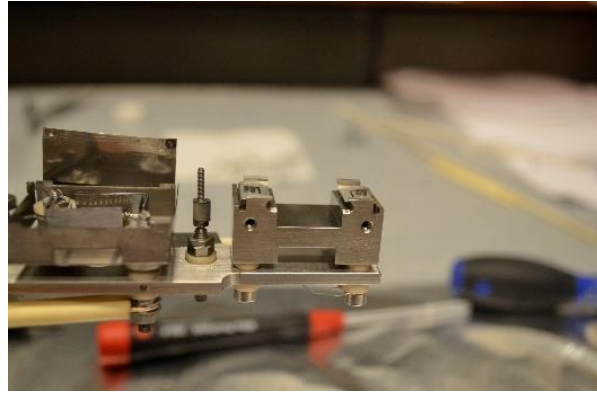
Custom-made holder for the tip carrier during assembly.
